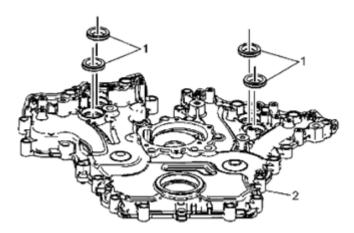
Identifying Oil Seal And Timing Chain Cover Courtesy of SUZUKI OF AMERICA CORP.
